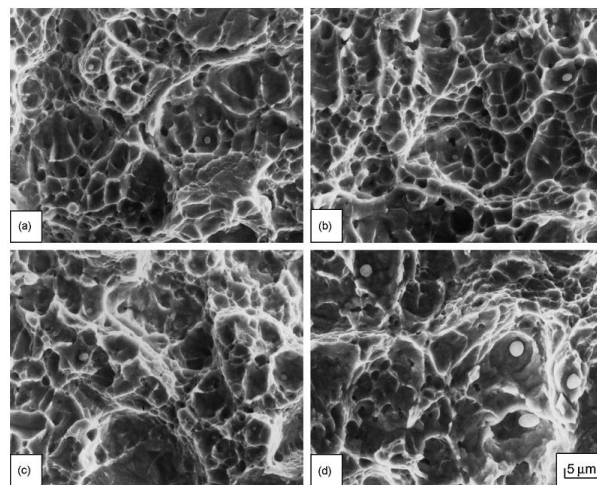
Fractographs of the compact tension specimens used to measure fracture toughness of four different wires [56]
